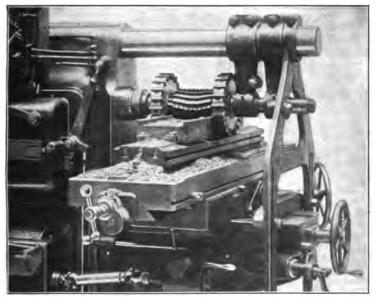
Milling Top and Sides of Casting with Gang Mill
